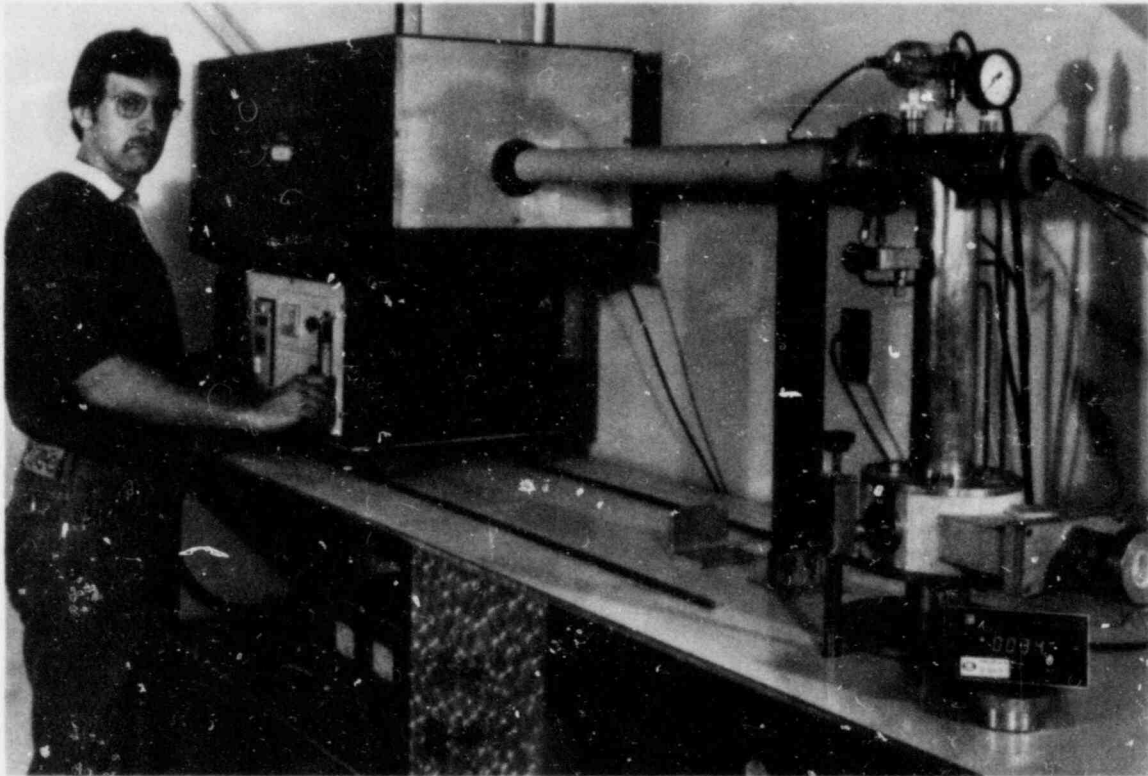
Vacuum furnace with movable heating element being used to braze end seals on a batch of triaxial cables.
